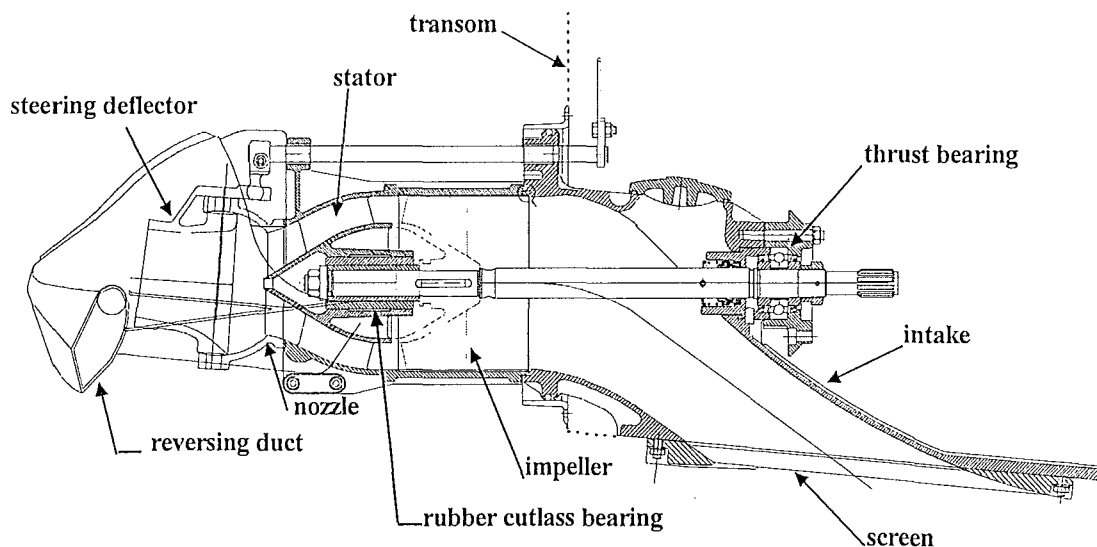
Sectioned view of Hamilton 212 waterjet
